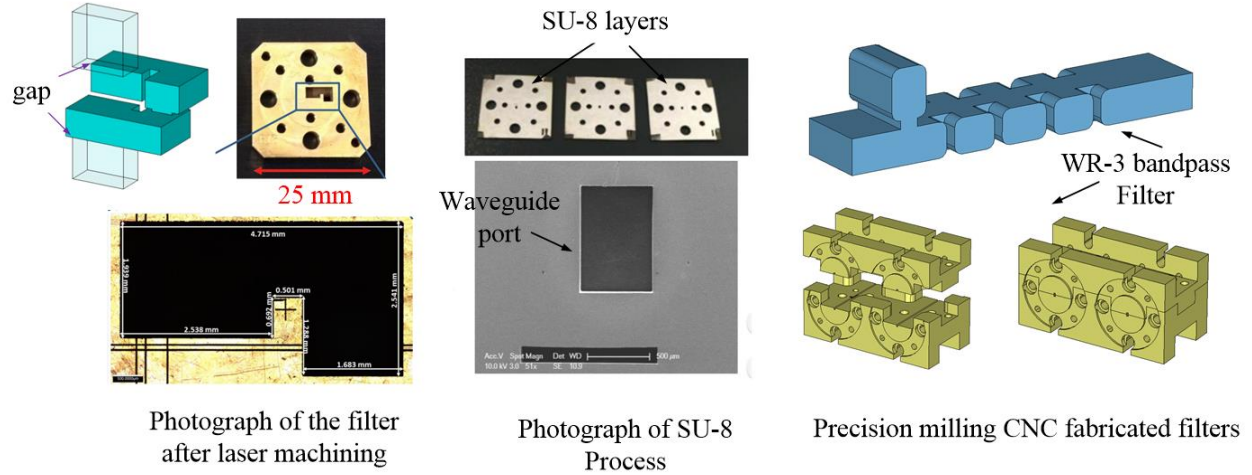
Waveguide components fabricated using micromachining techniques [5], [6].
